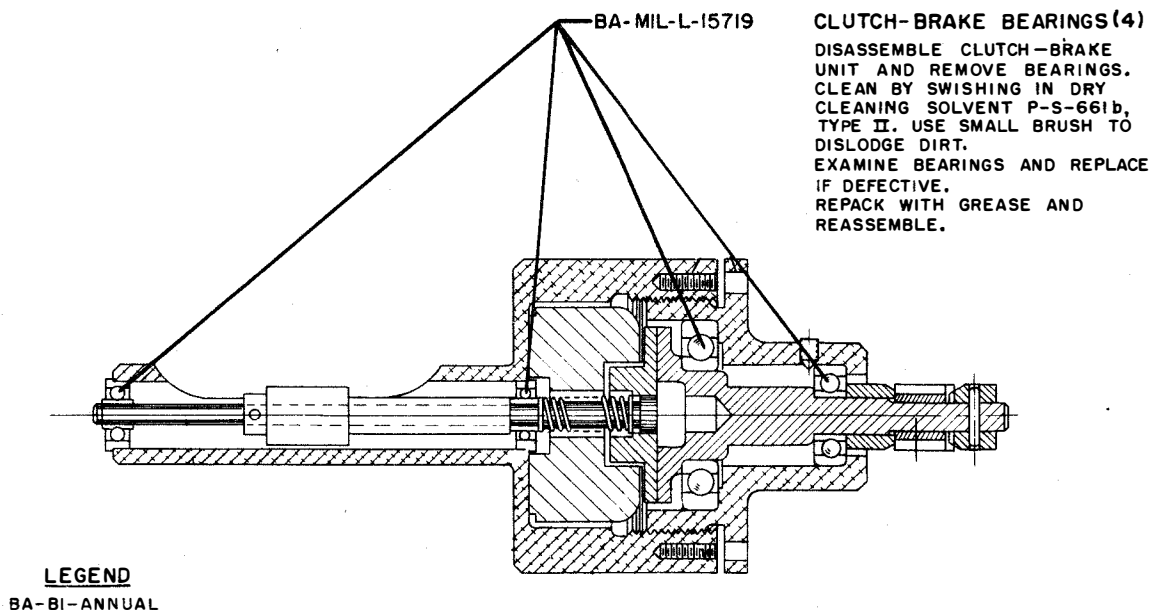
R-f Tuner, Cross Section of Clutch-Brake Assembly, Lubrication
